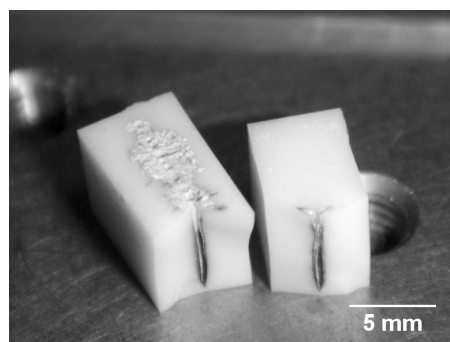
A shattered Y-TZP block after laser machining which was not optimized to reduce cracking.
